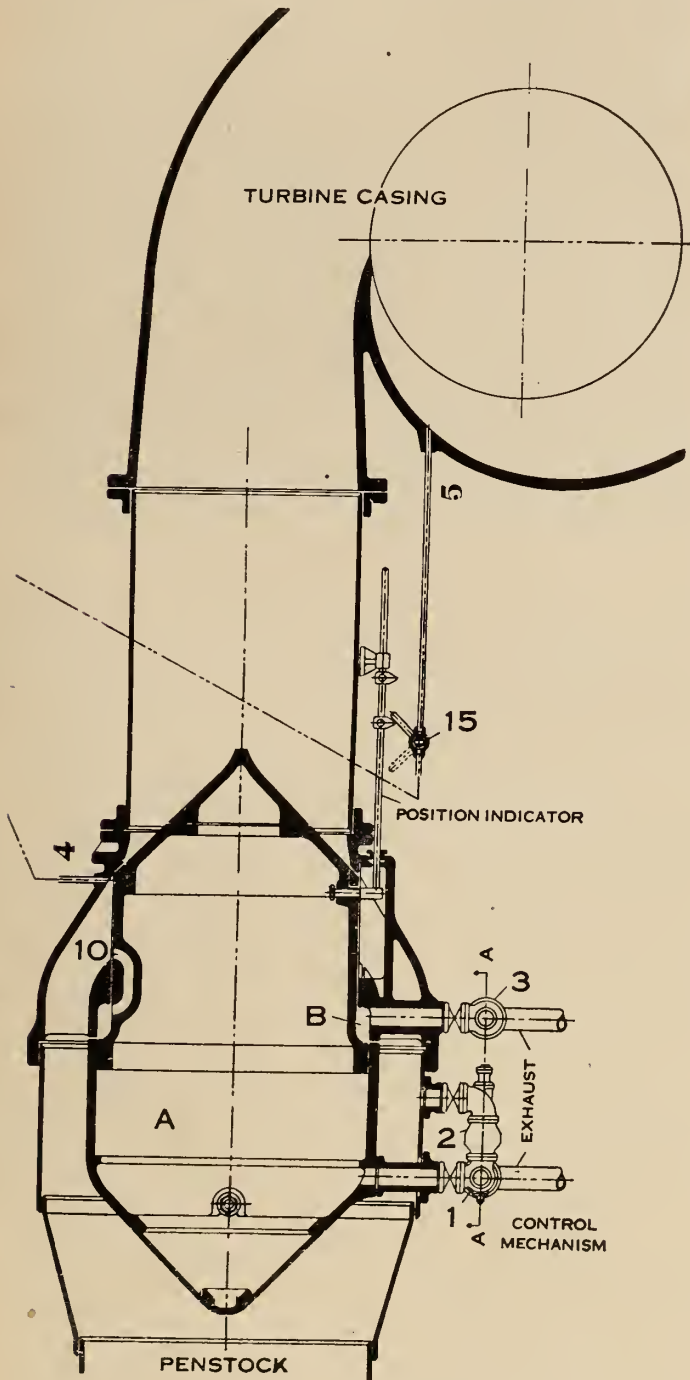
Diagrammatic Sketch of Johnson Valve.
